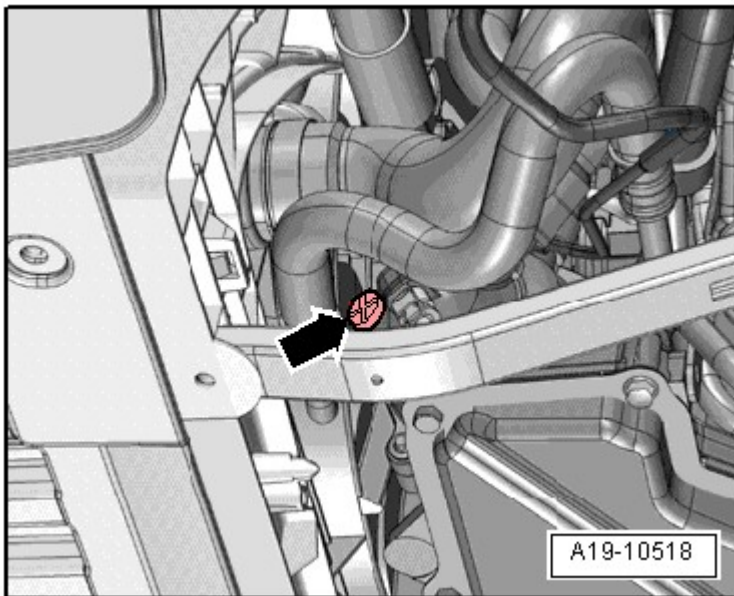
Identifying Drain Plug -Arrow- On Map Controlled Engine Cooling Thermostat -F265-
